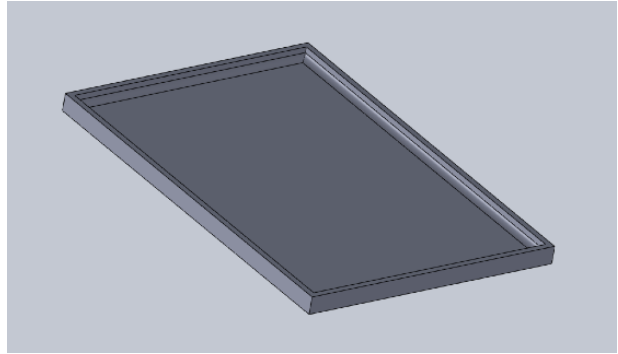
SolidWorks drawing of stainless steel pan that will hold preexisting monkey board.
